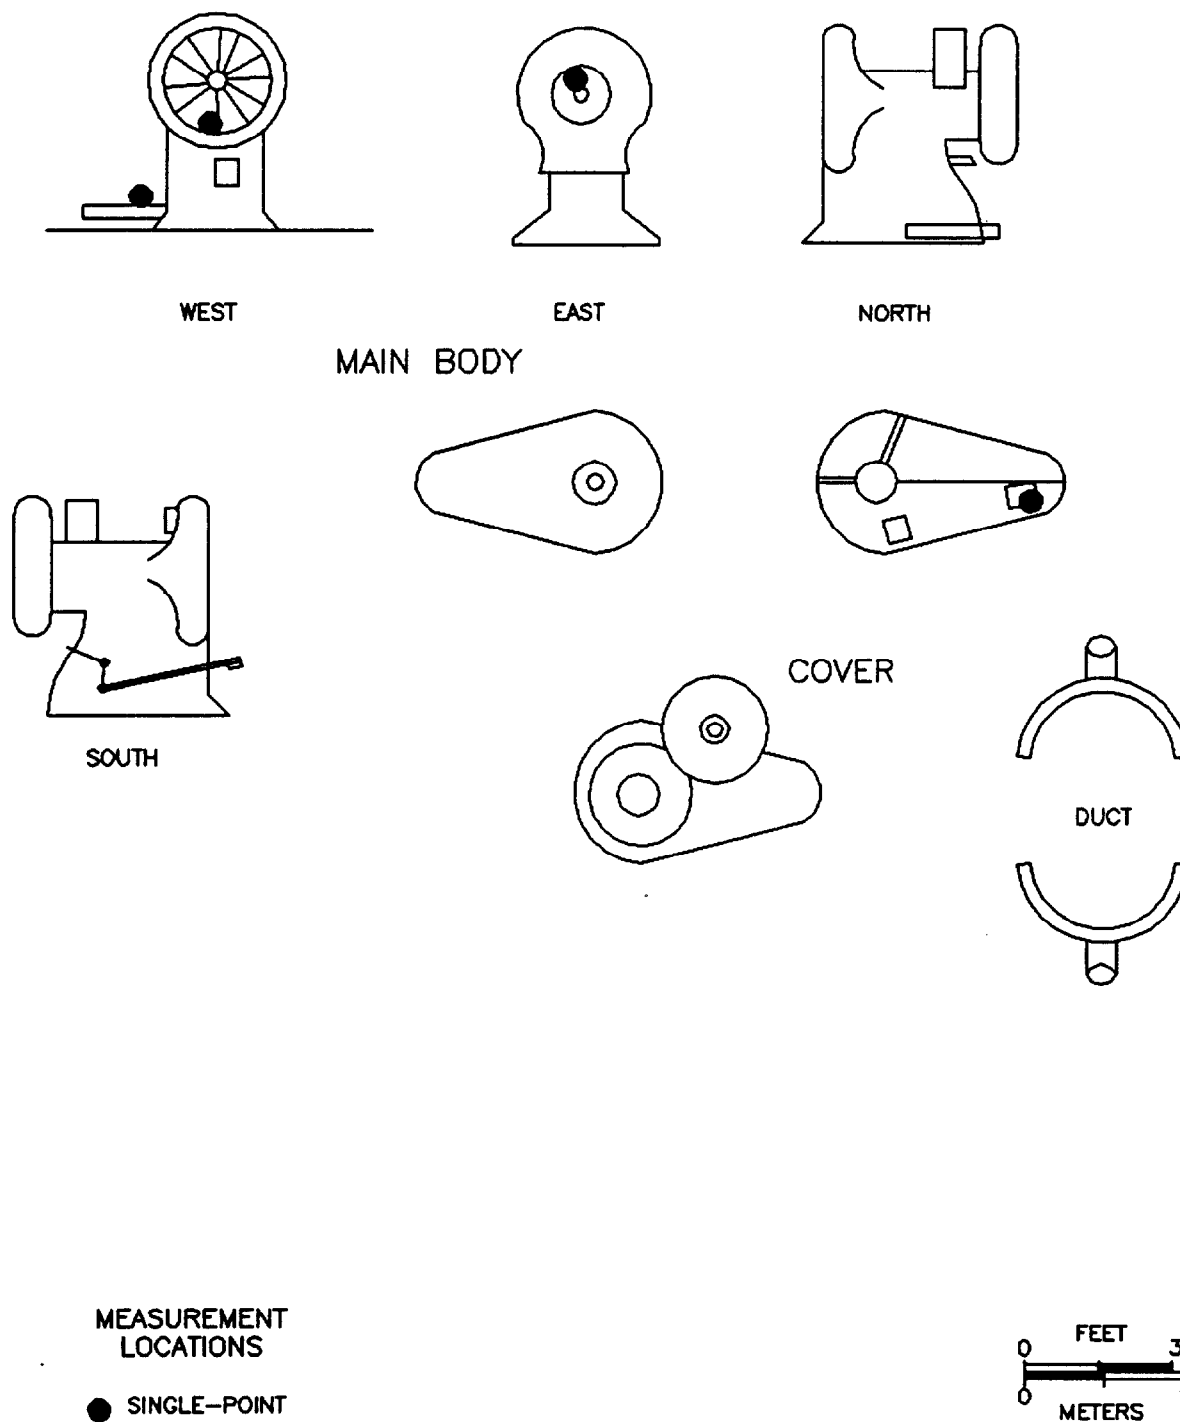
Building 30, Fabrication Room, Extruder #40659 – Measurement Locations
